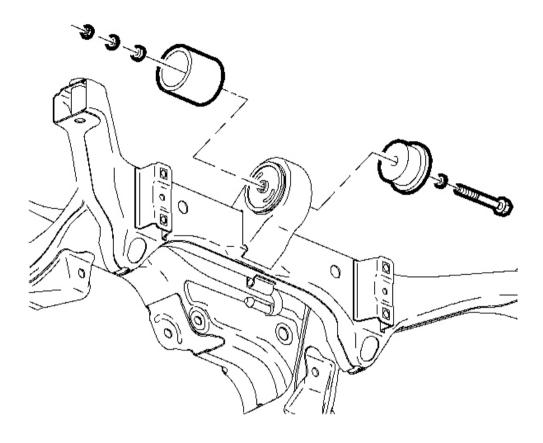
Removing The Bushing From Support Assembly Courtesy of GENERAL MOTORS CORP.
